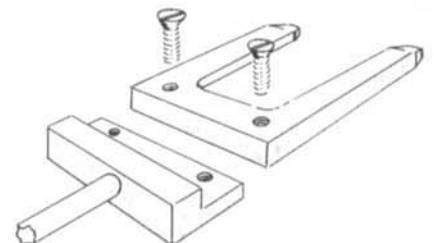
Schematic drawing of monolithic positioning-pin assembly.
